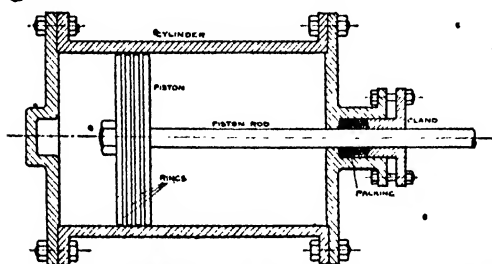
The cylinder and piston of a steam engine, which illustrates in a general way the construction and working of all cylinders and pistons in engines, pumps, presses, and lifts.
